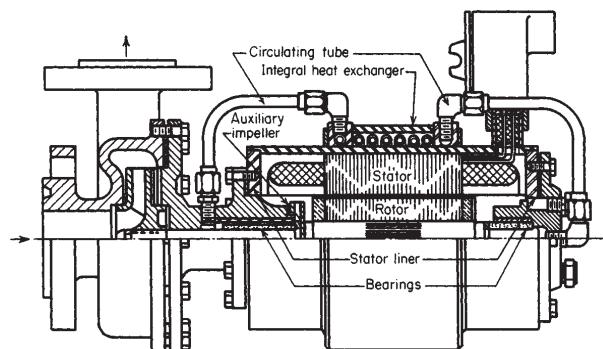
Canned-motor pump (Courtesy of Chempump Division, Crane Co.)
